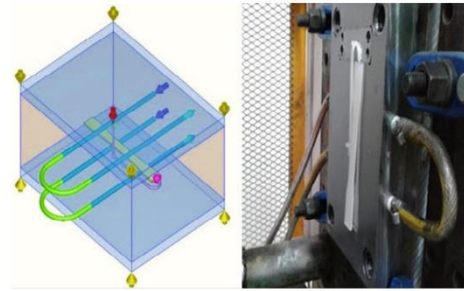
The specimen and cooling system design via Moldex3D simulation and Toshiba IS80 Injection molding machine.
